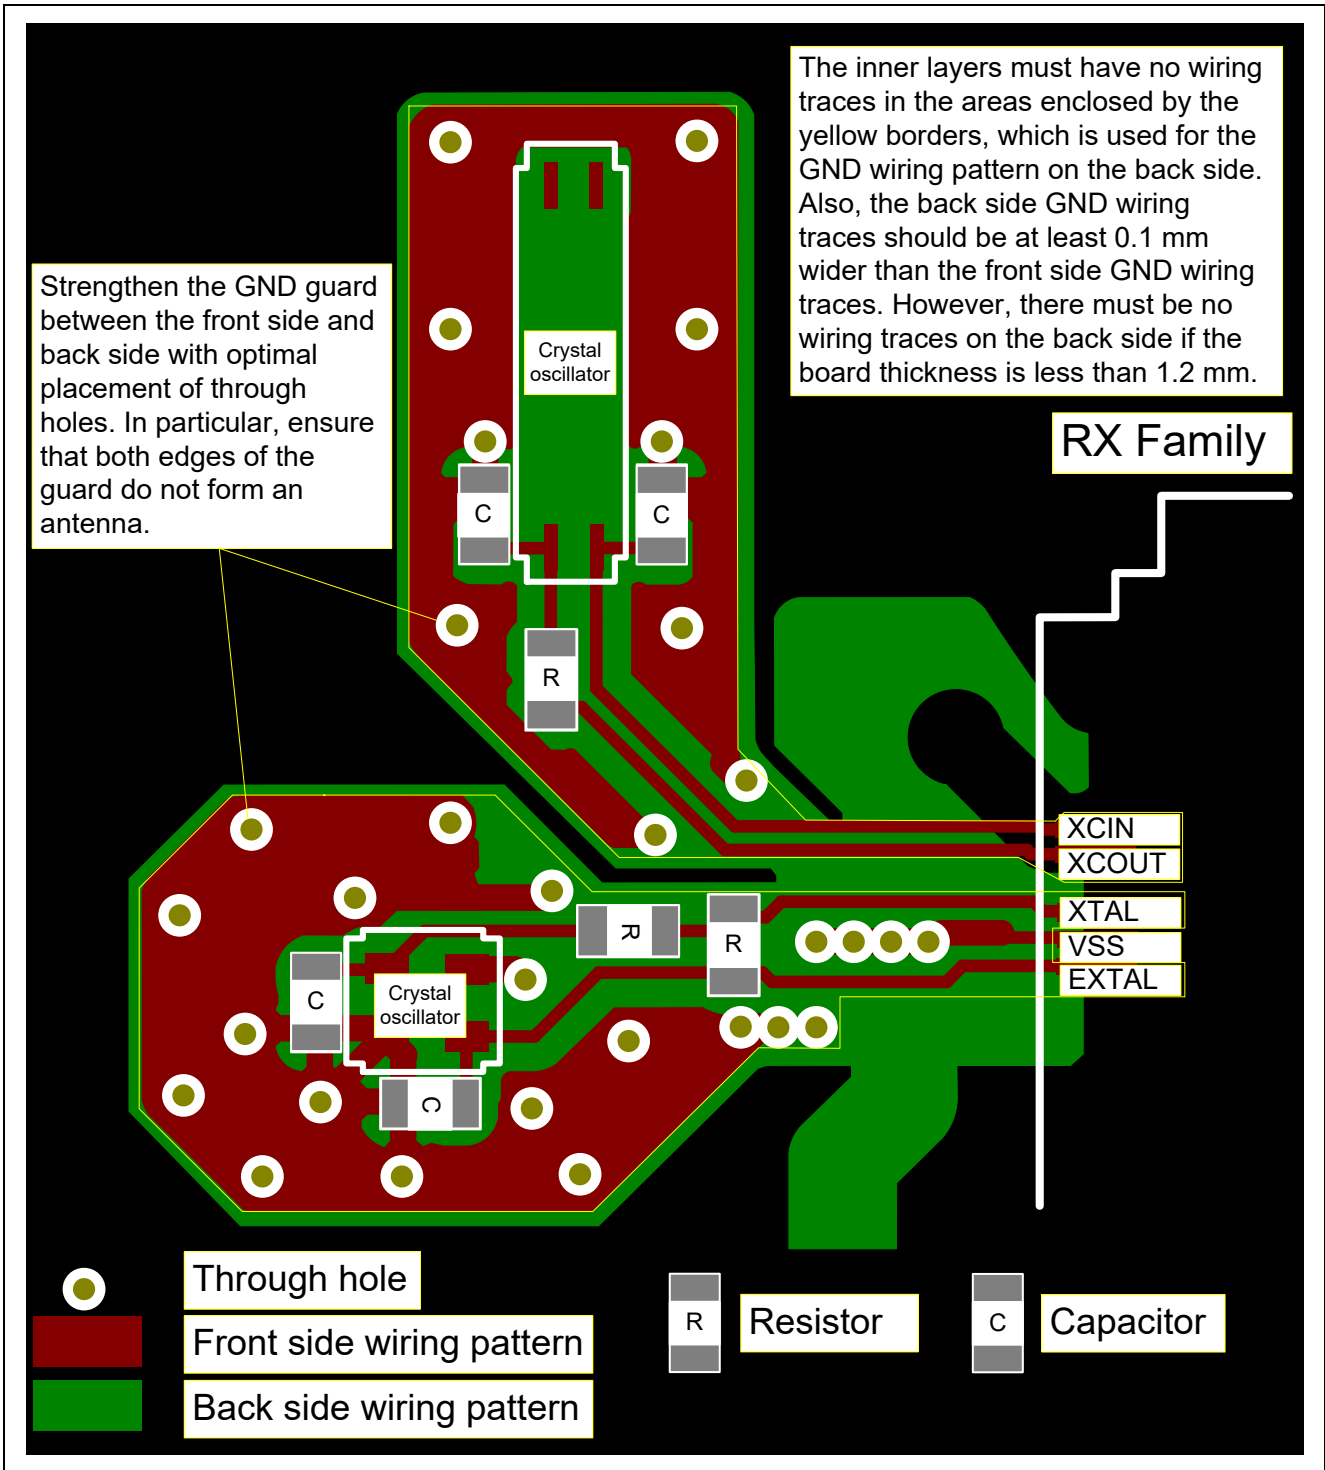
Example Clock I/O Pin Wiring Pattern
